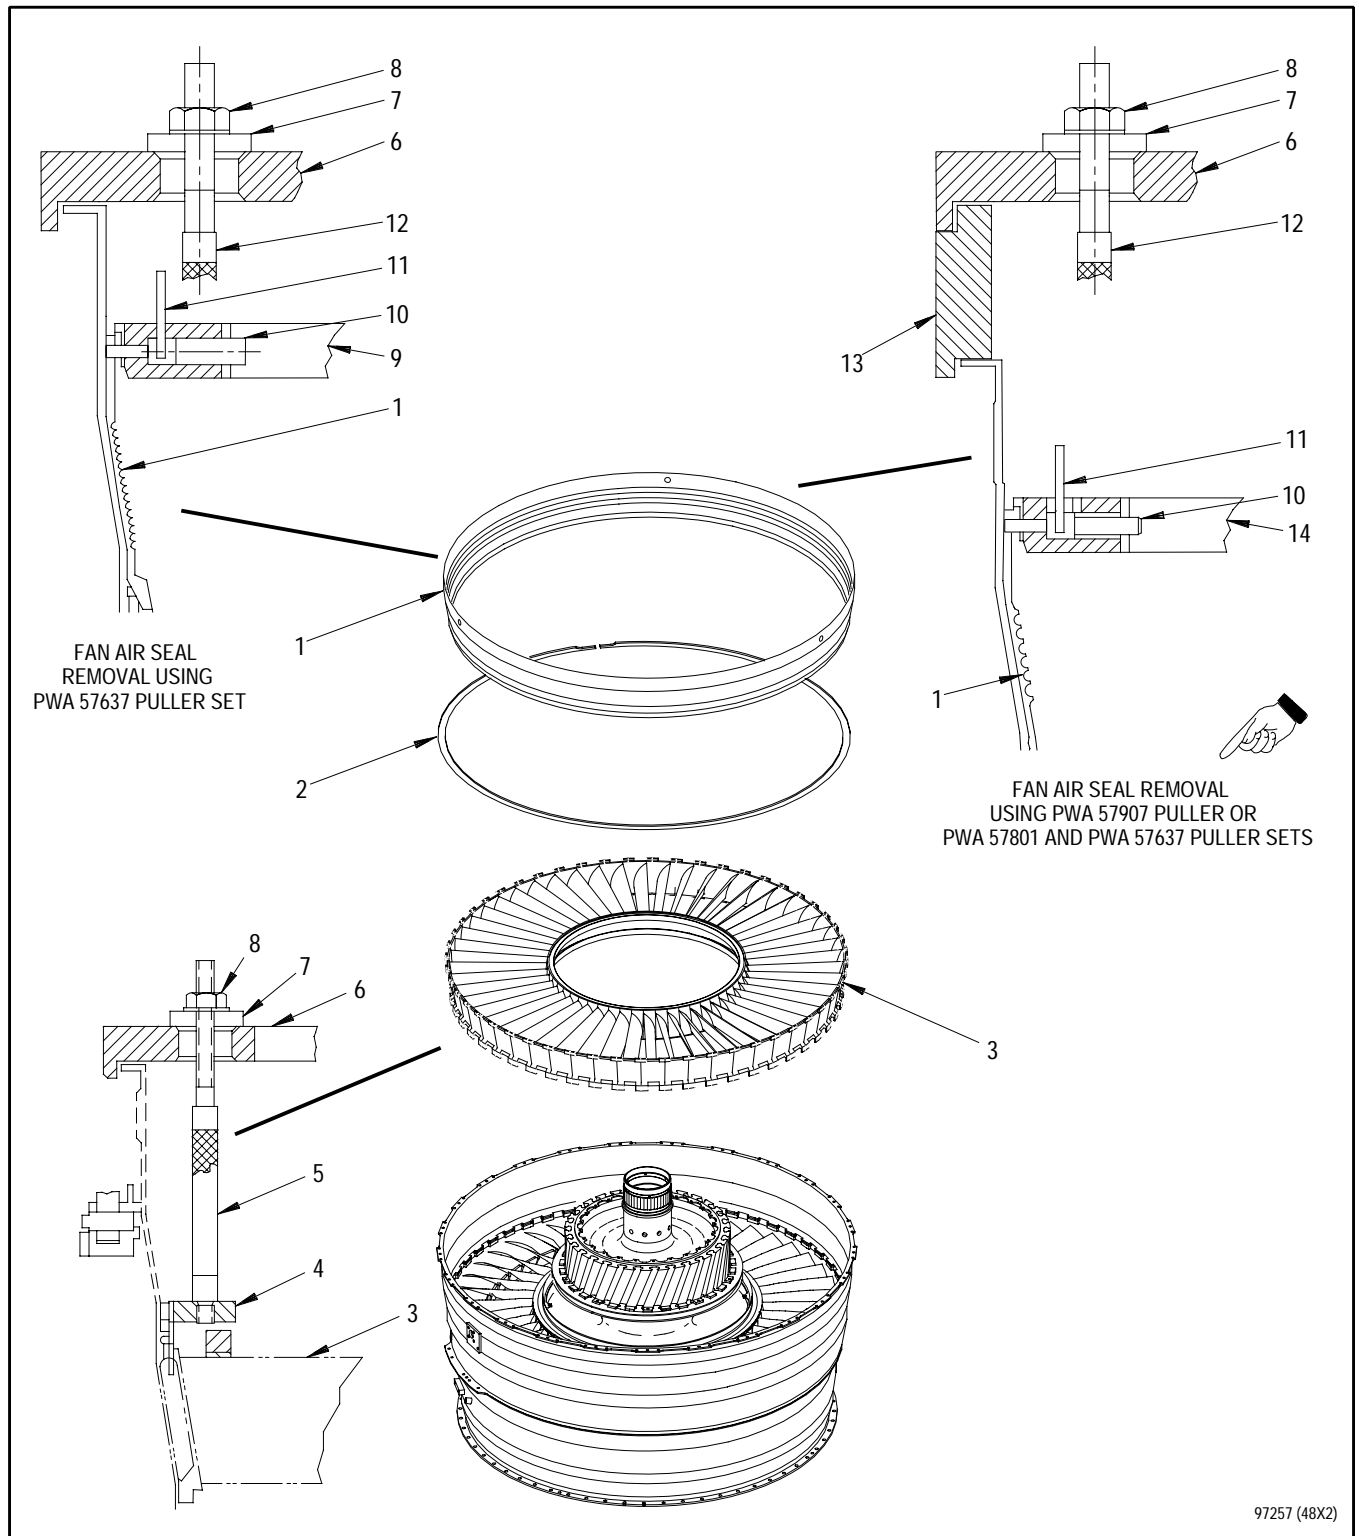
First Stage Fan Air Seal and First Stage Compressor Stator Assembly - Removal
